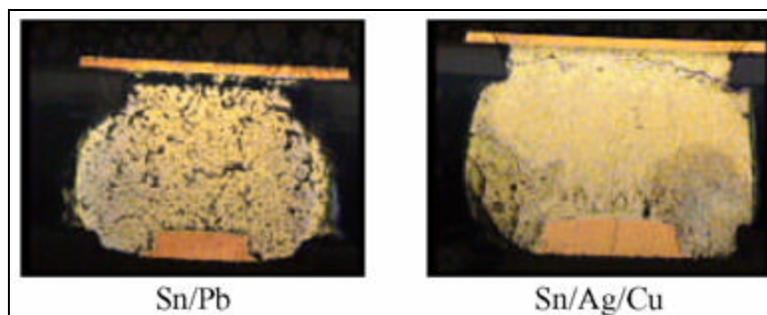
Cracked Solder Joints for Sn/Pb and Sn/Ag/Cu Alloys due to Temperature Cycling
